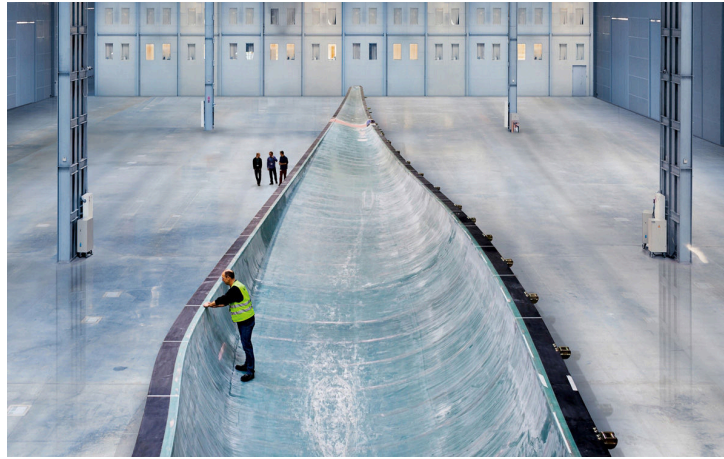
Composite mold of a rotor blade half for wind turbines
